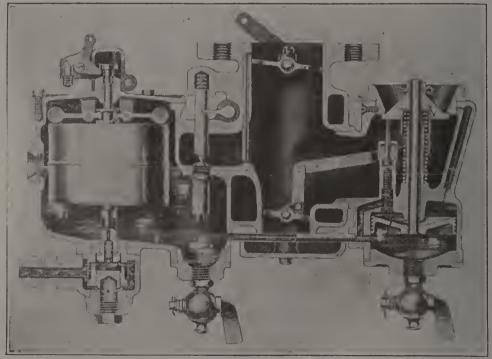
Rayfield Carburetor, Model "G", Internal Construction
